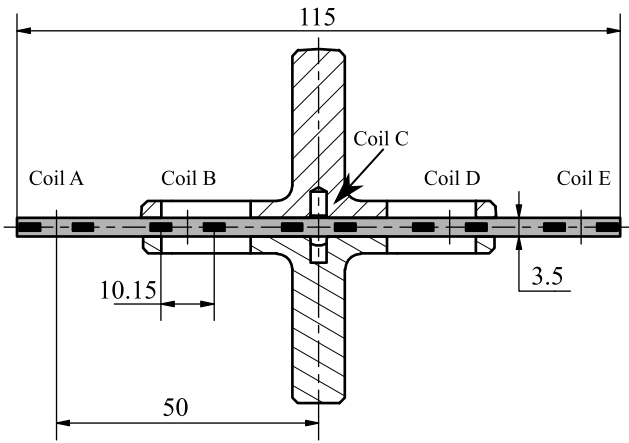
Cross section of the PCB and support shaft with the main dimensions given in millimeter. The PCB is marked in gray, whereas the coil windings are in black. The magnetic length of the coil is 600 mm. The length of the entire board is 650 mm to fit the wire connections and holes for the retro-reflectors.
